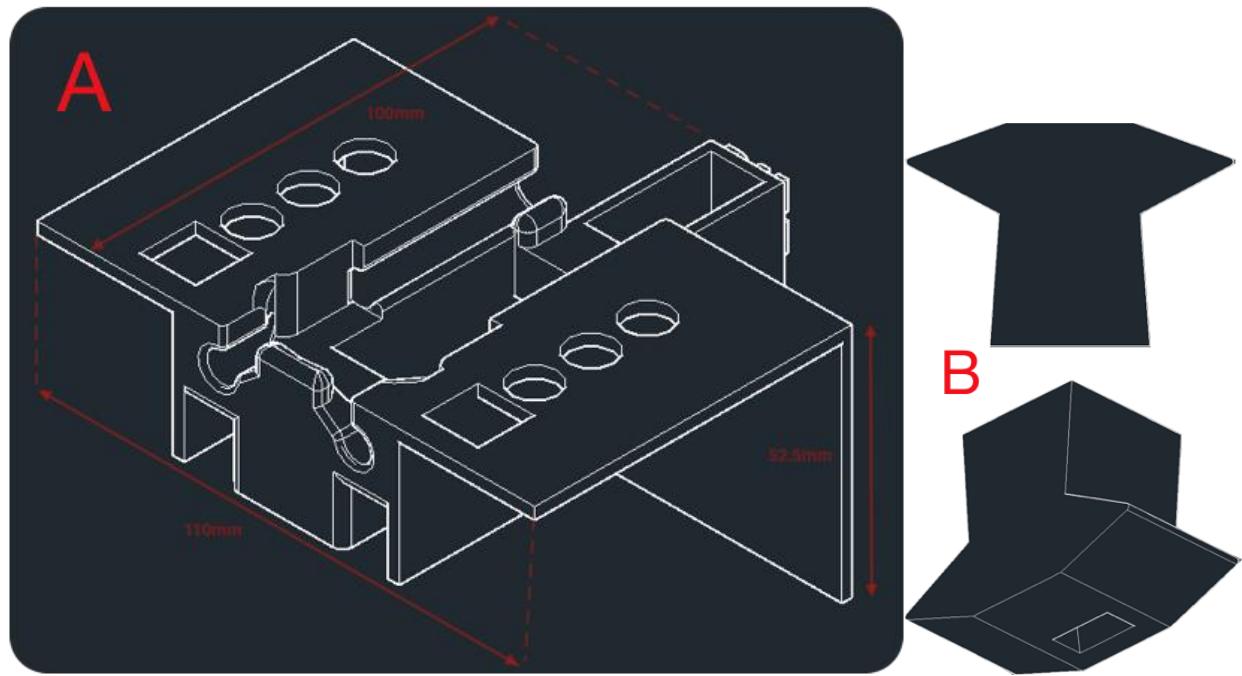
(a) Design Schematic of Pinch Valve Housing. (b) Design Schematic of Flange
